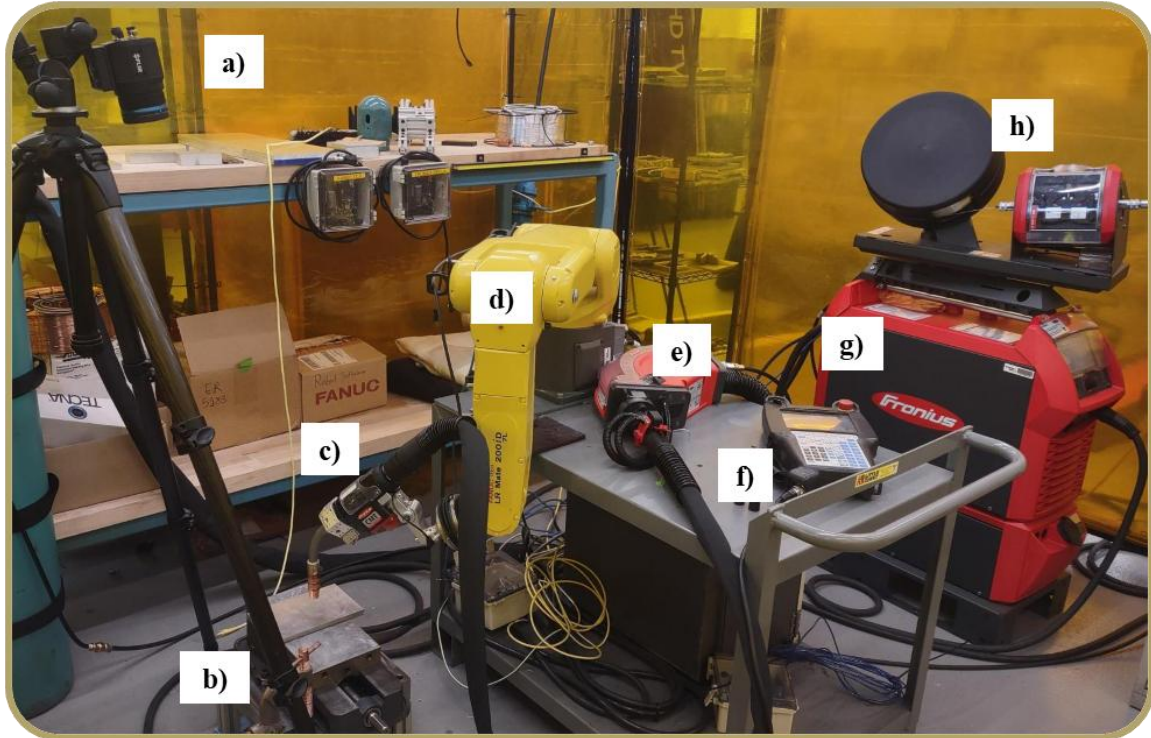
The WAAM-CMT cell used to carry out all experiments: a) FLIR A700; b) build plate, vice, & substrate; c) CMT drive & torch; d) FANUC robot; e) welding split box; f) robot controller; g) Fronius welding system; h) wire spool & feeder
